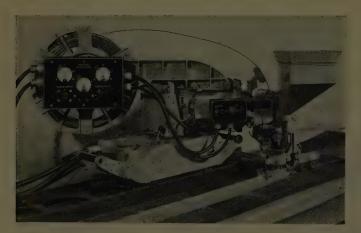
Heavy-duty portable welding machine showing the UE-type operating controls
